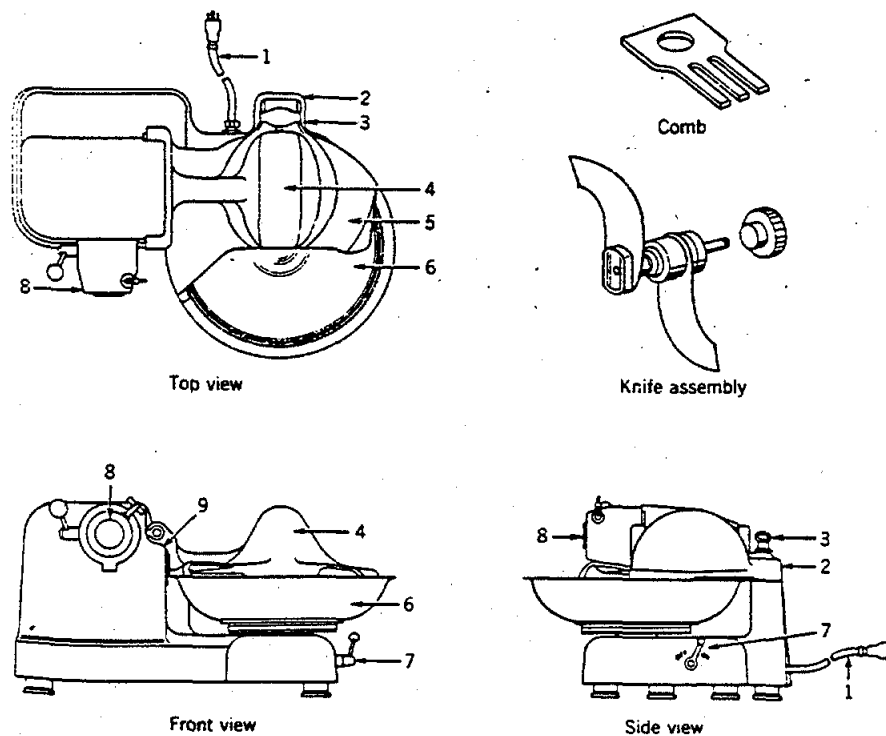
Food cutter: 1- electric cord, 2- location of comb, 3- cover-lock knob, 4- location of knives, 5- bowl cover, 6- bowl, 7- switch, 8- attachment hub, and 9- cover hinge.
